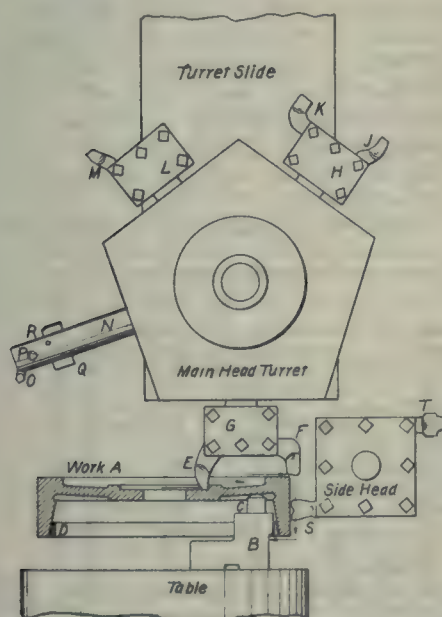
TOOL LAYOUT, FIRST SETTING.
